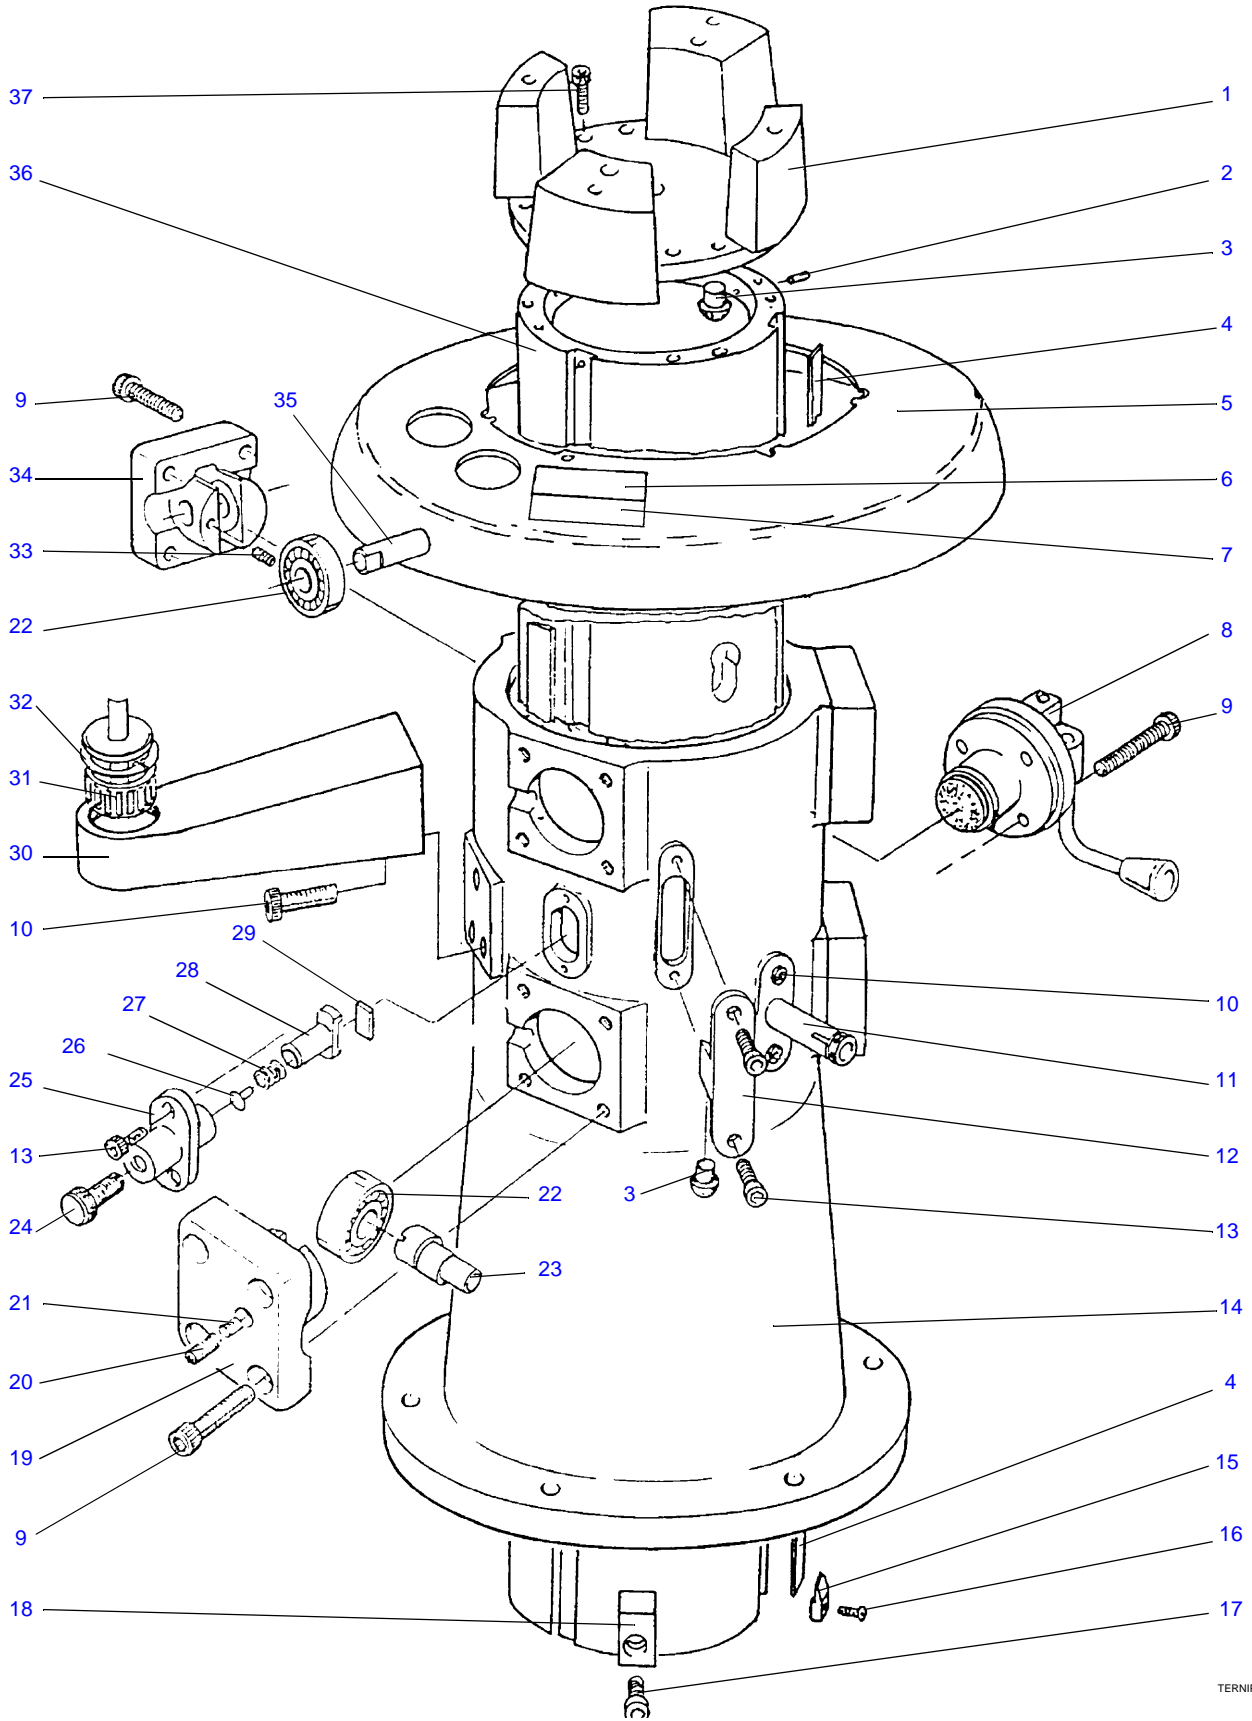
Tern Pedestal - Column Assembly (3741-5)
